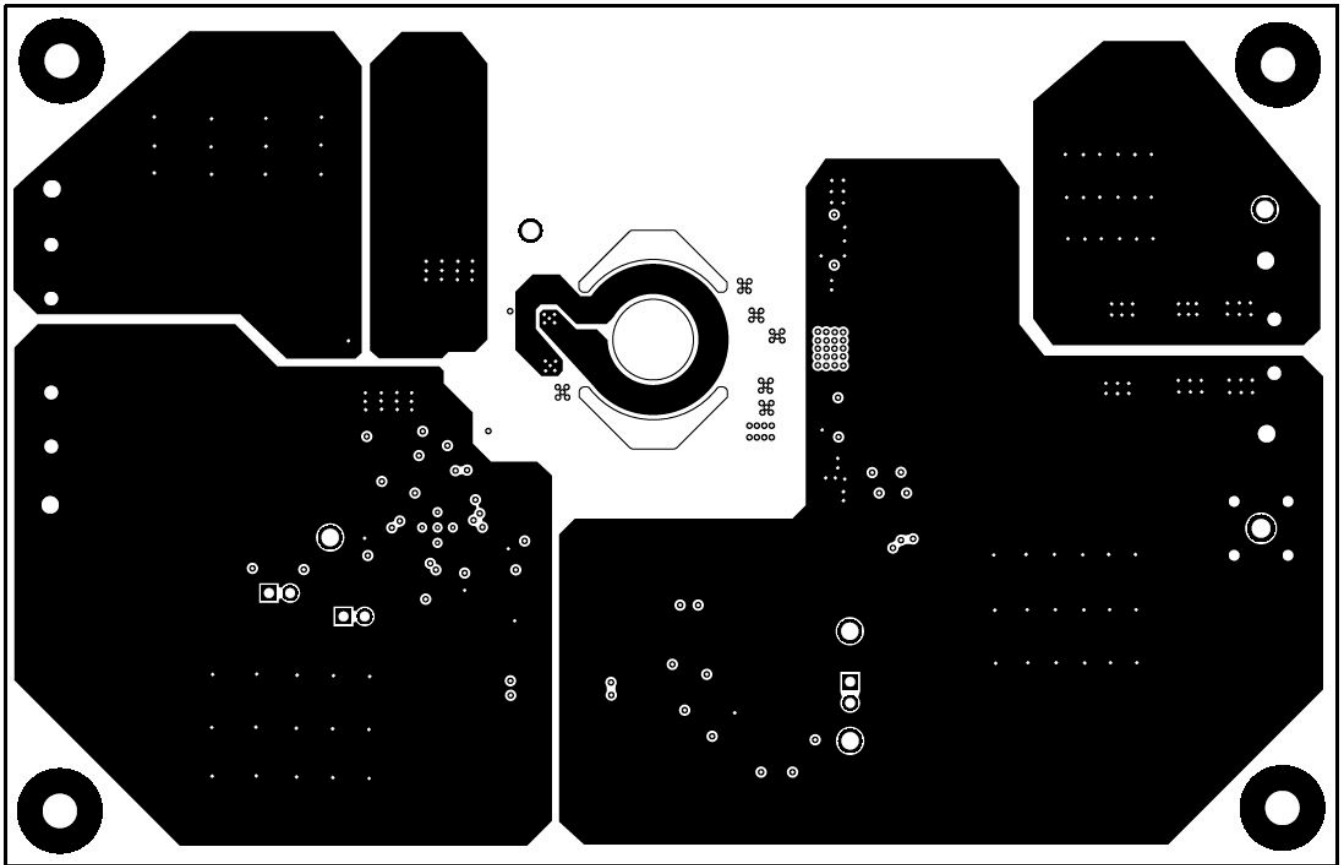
LM5036 EVM: Layer 7 PCB Assembly layout
